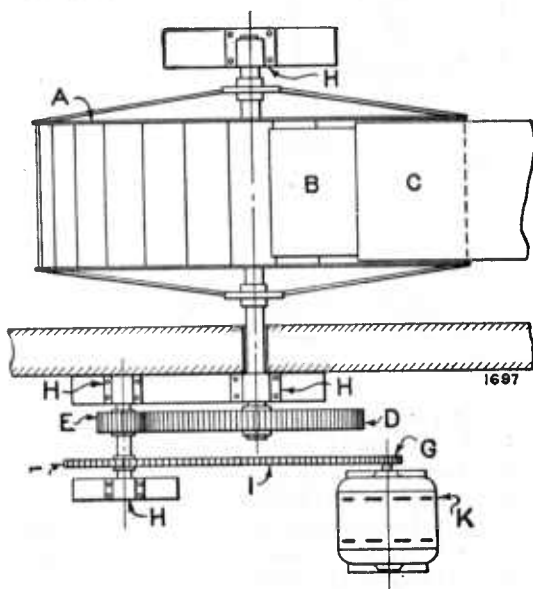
Overshot water wheel with roller chain drive. Where space does not permit belt drive and the line shaft is too far away for gear drive from the jackshaft, the difficulty may be overcome in this manner. A, water wheel; B, chute; C, flume; D, drive gear; E, pinion gear; F, drive sprocket; G, generator sprocket; H, bearings; I, roller sprocket chain; K, generator
